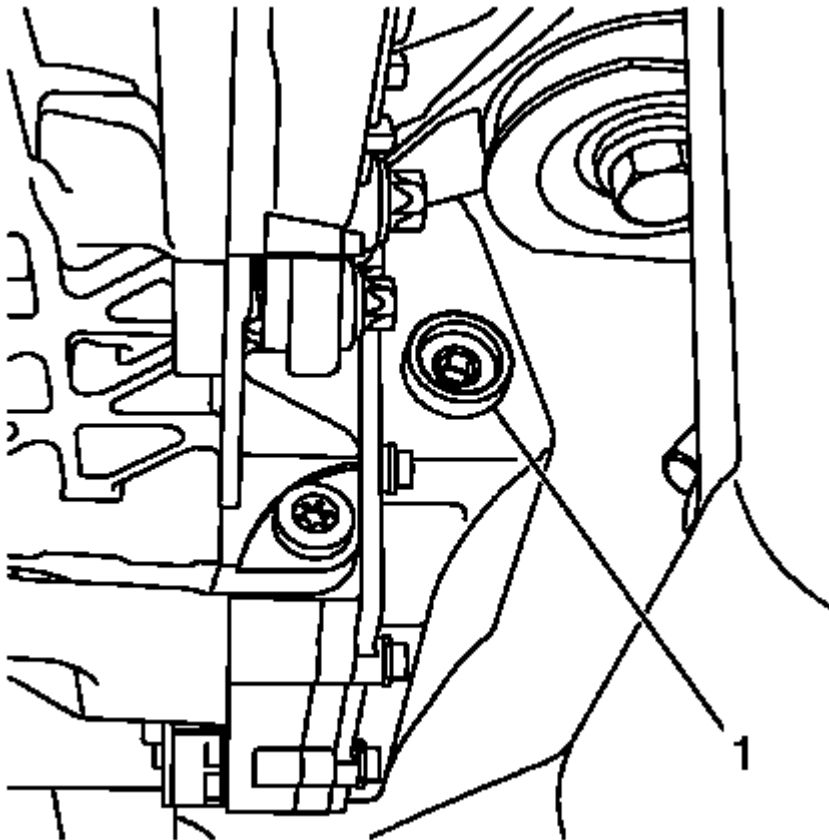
Identifying Rear Axle Lubricant Fill Plug
